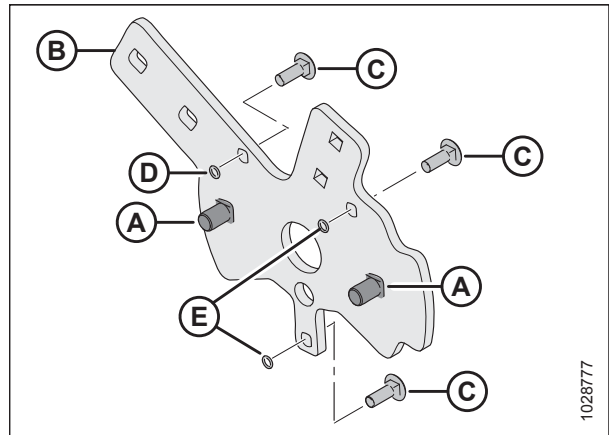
Bolts Installed in New Right Auger Support Bar
